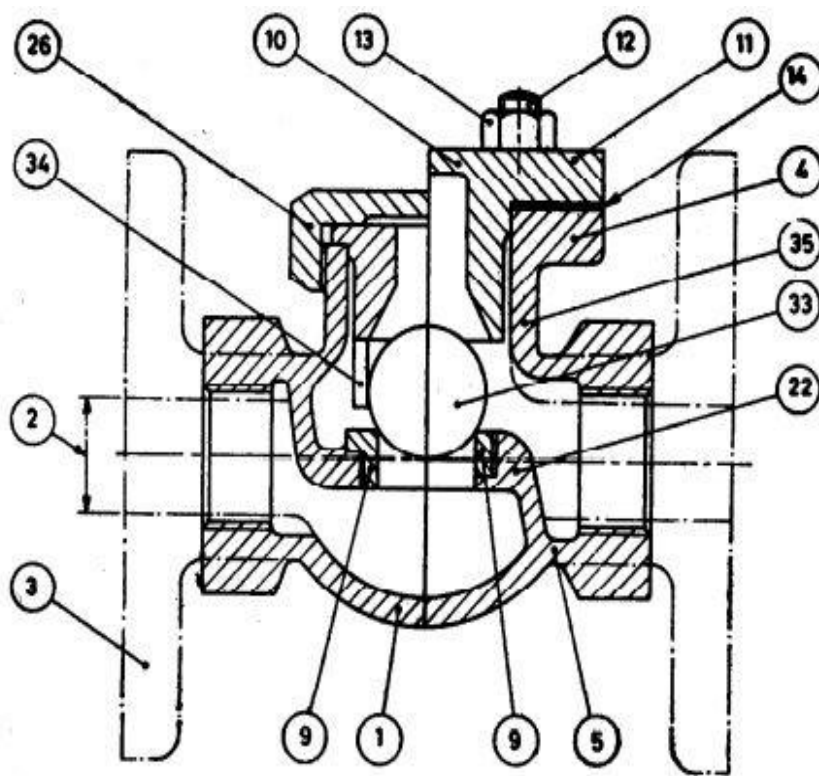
HORIZONTAL PATTERN LIFT TYPE BALL CHECK VALVE
